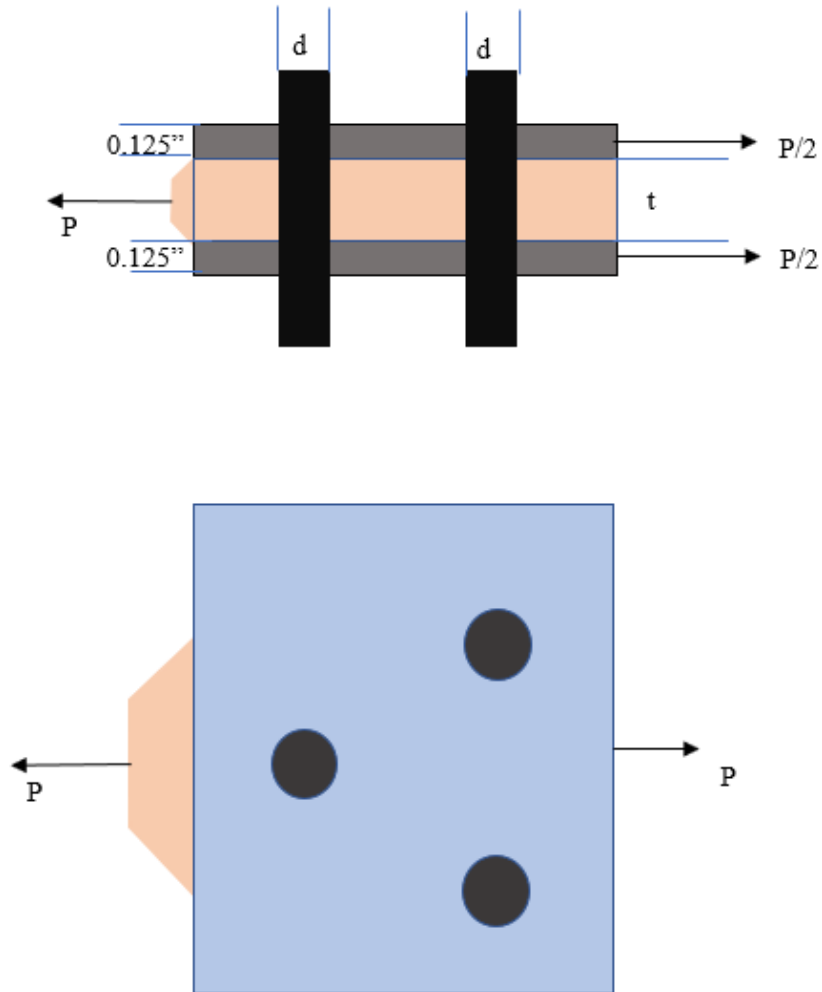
Updated Hole Pattern to Reduce Bearing Stress
